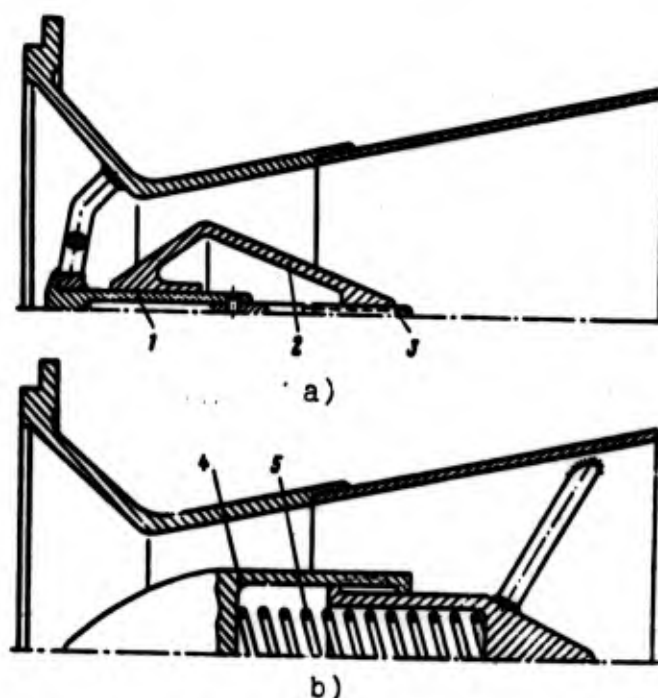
Variable-area nozzles: a) preadjusted; b) self-adjusting; 1 - bushing; 2 - central body; 3 - screw; 4 - mushroom; 5 - spring.
